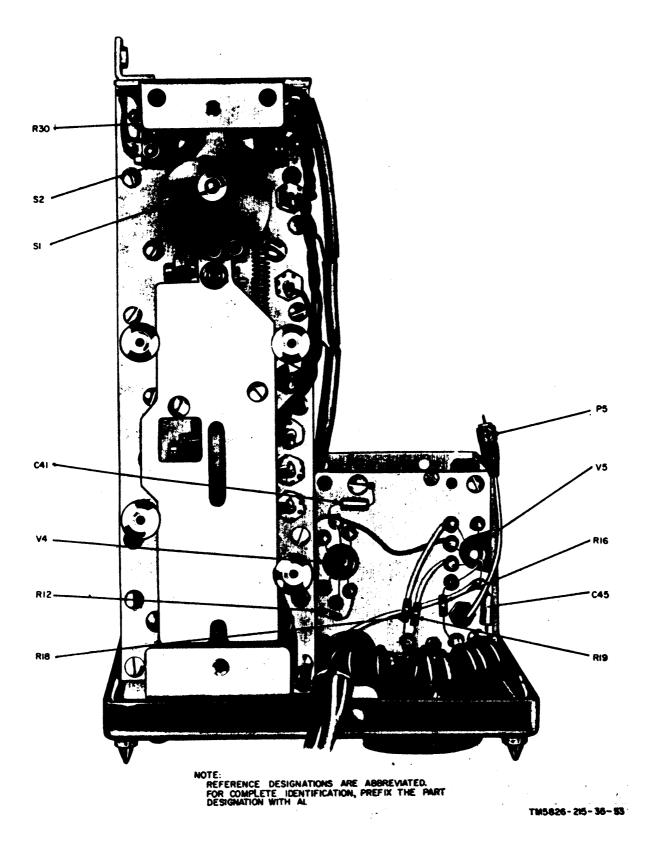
Vhf navigation receiver, rf/if. assembly, bottom view.
